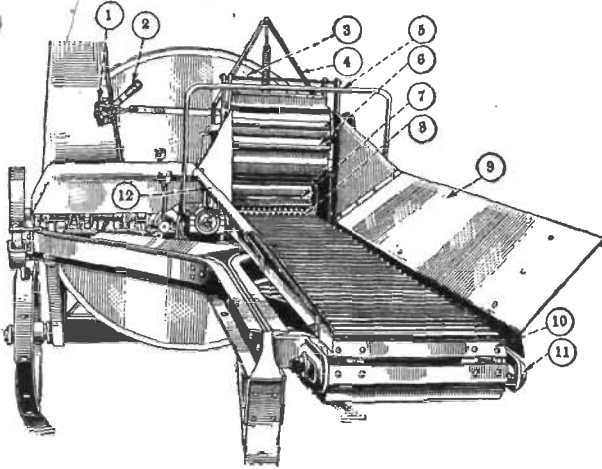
Carrier apron and feed rolls: 1, 2, lock for cover; 3, fan cover; 4, spring yoke; 5, clutch and control lever; 6, paddle feed roll; 7, upper feed roll; 8, lower feed roll; 9, table side; 10, carrier slat; 11, adjustment for carrier tension.
